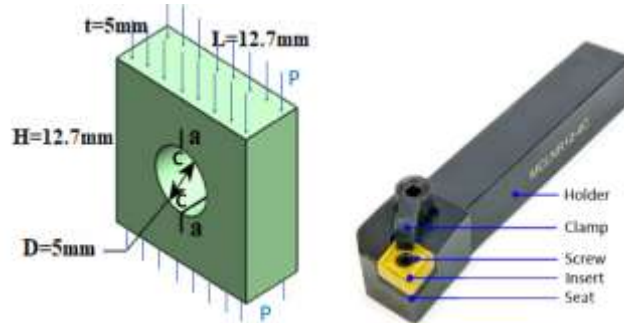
a. A crack (a) emanating from a circular hole (D) of a rectangular tungsten-carbide plate (H,L,t) under compression P. b. Tool holders for a Common square single cutting tool insert
